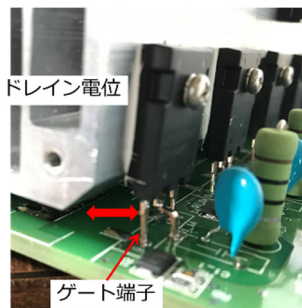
Mounting technique of 3.3 kV device to heat sink.
